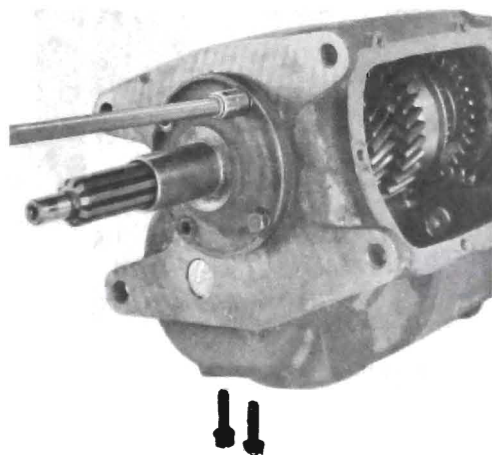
Removing Main Drive Gear Bearing Retainer Bolts
